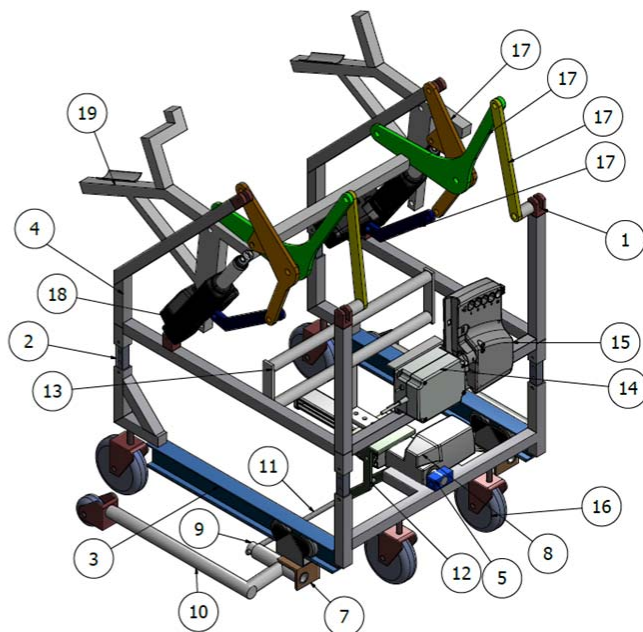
CAD Drawing of the Assembly of Assistive Lifting Device
